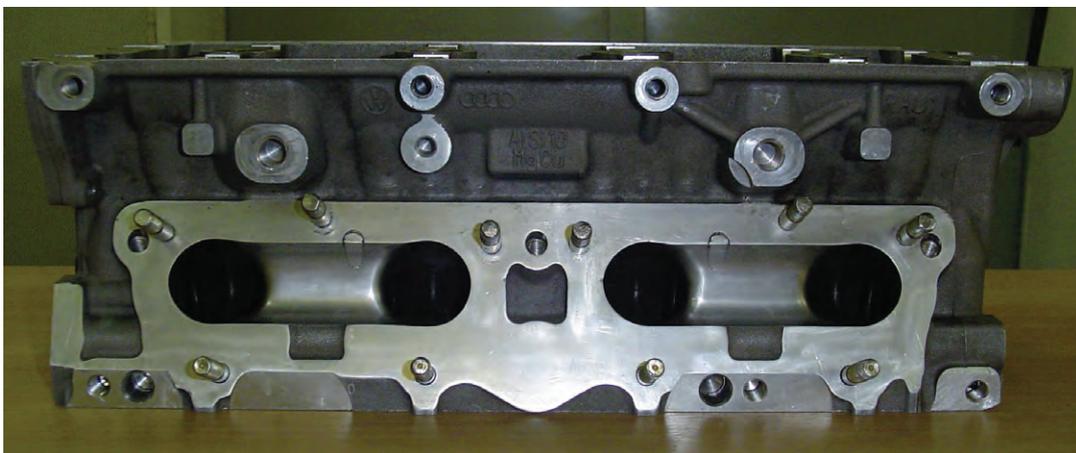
Five-stroke engine cylinder head with channels connecting fired cylinders with additional expansion cylinders
